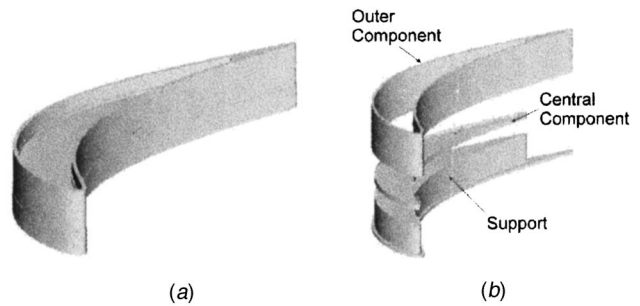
Squealer tip assembly—(a) exploded view, (b) assembled view
